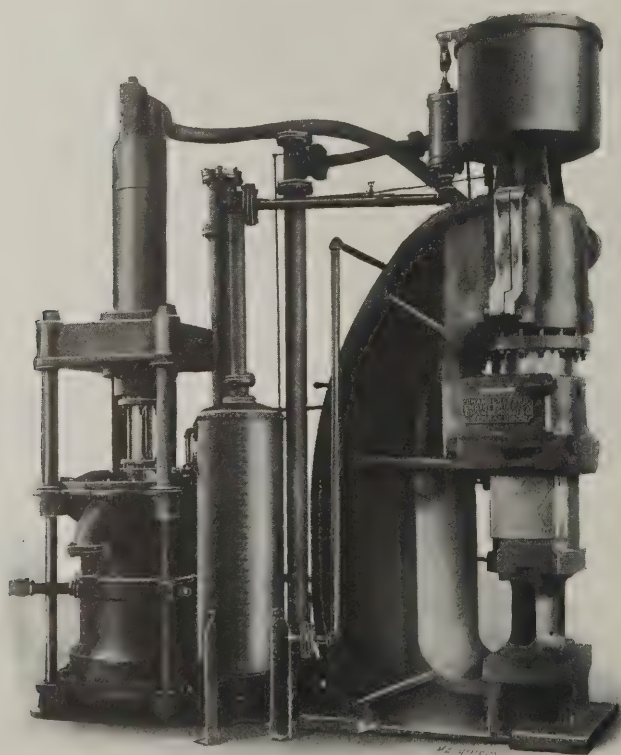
Opposite Side of Steam-hydraulic Forging Press
